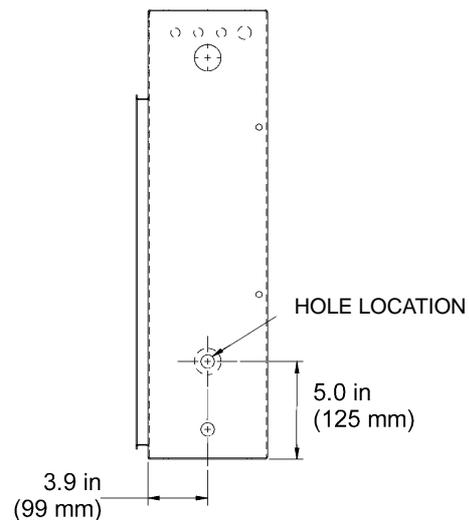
STARTER ENCLOSURE (WITH HORN MOUNTING HOLE LOCATION)
